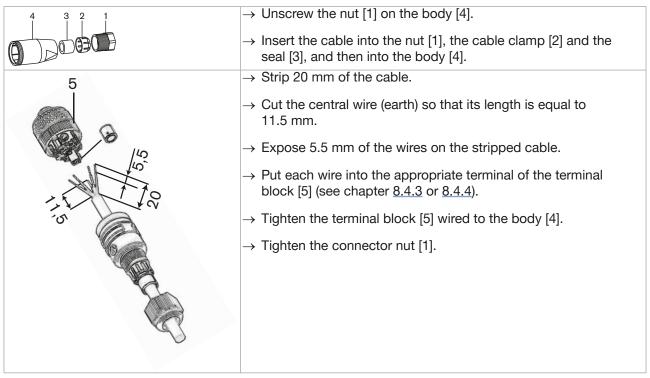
Assembling the M12 multi-pin connector (not provided)
